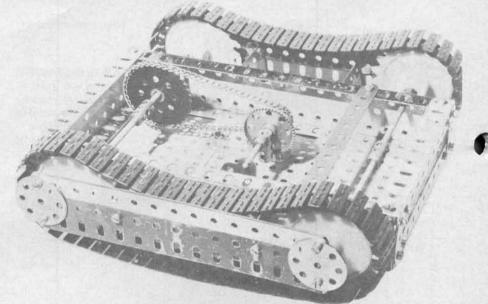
Simple Meccano Sprocket Chain drive to crawler blocks on a model excavator.
